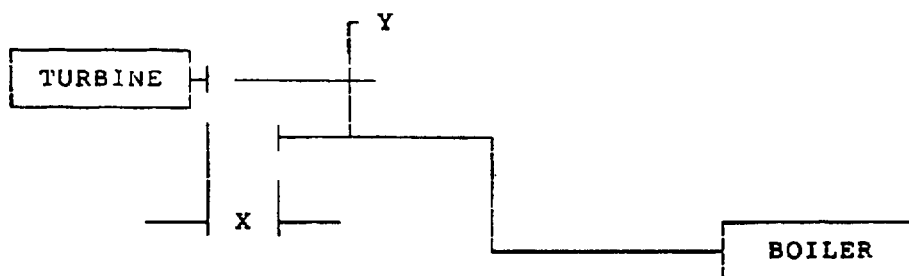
Turbine Flange Alignment at Cold Conditions
